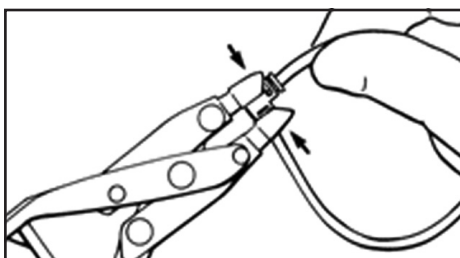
Use the tool twice when using a right angle connector – once on each connector end
